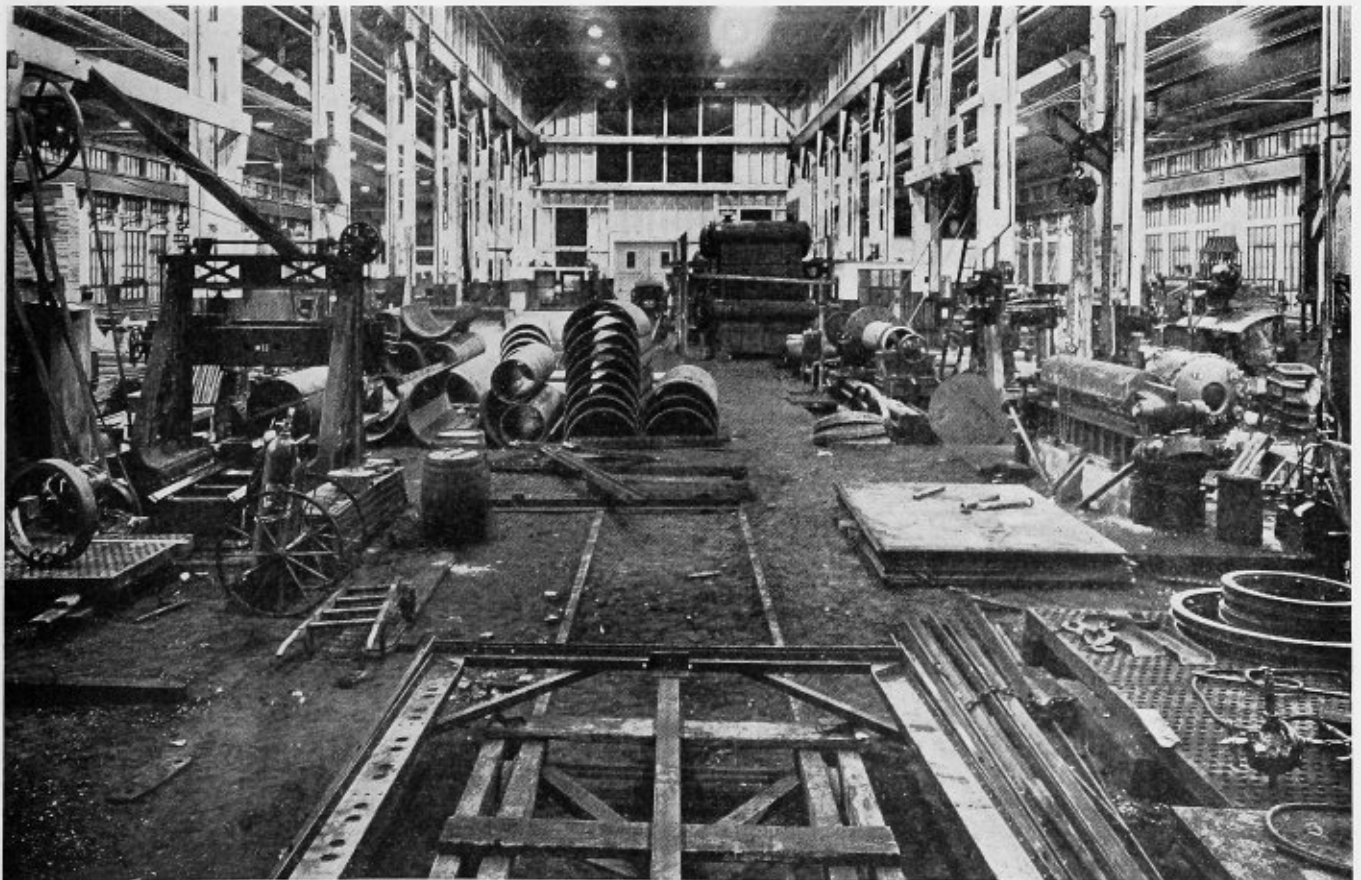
Center Bay of Plant, Showing Plate Planer and 300-Ton Plate Bending Press
